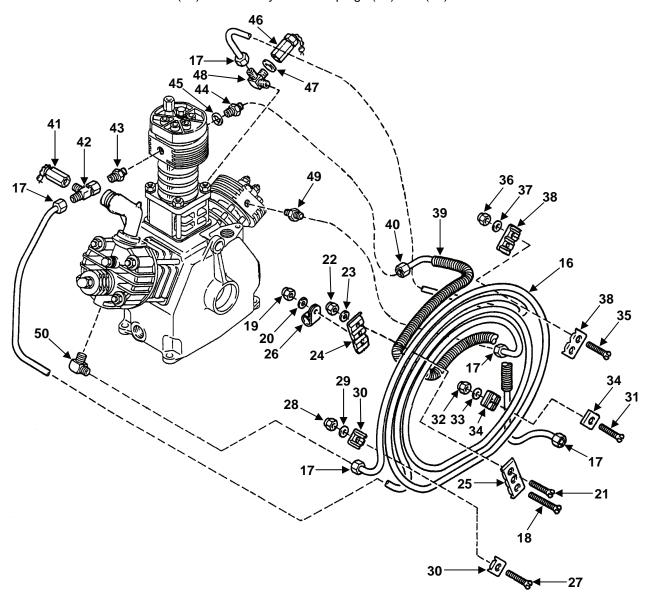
Air Compressor External Components (Sheet 2 of 2).
